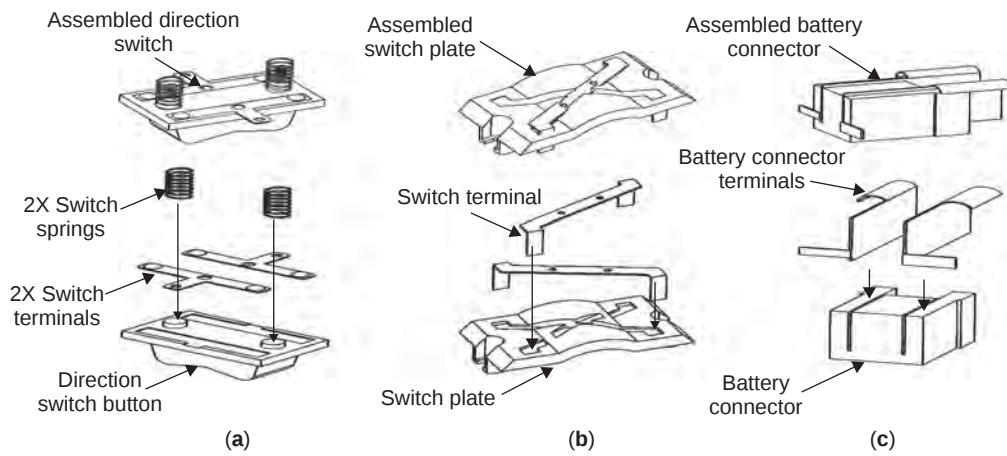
Cordless screwdriver product, showing particular components from Fig. 12.
